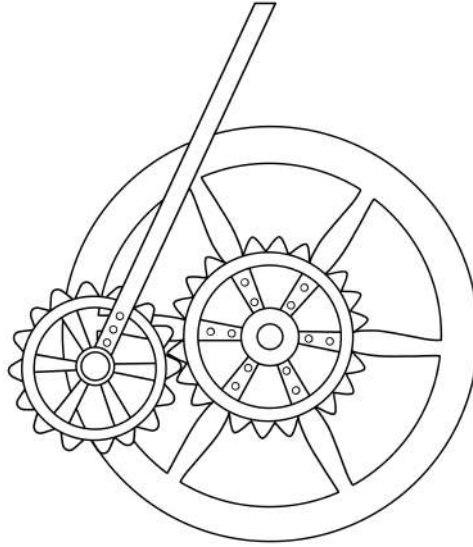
Solar and planetary gear mechanism that converts vertical motion into rotational
